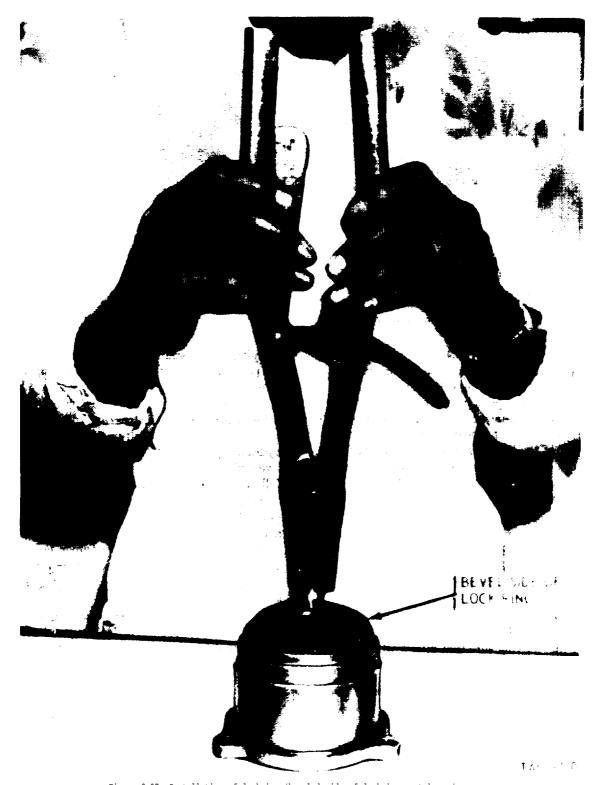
Installation of lockring (beveled side of lockring must be up).
